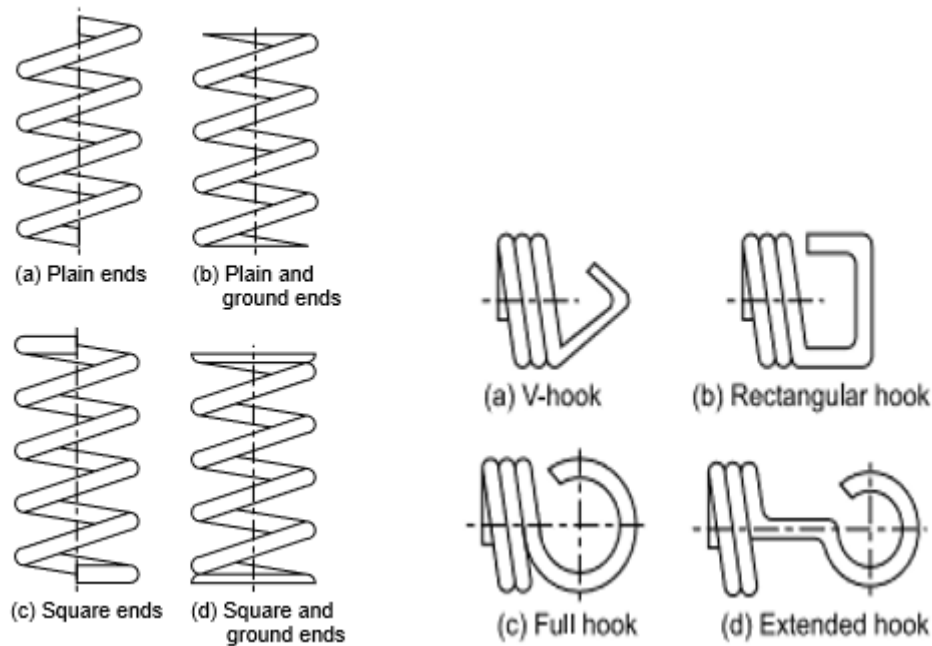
End Styles of Helical Compression Springs AND End Styles of Helical Extension Springs
